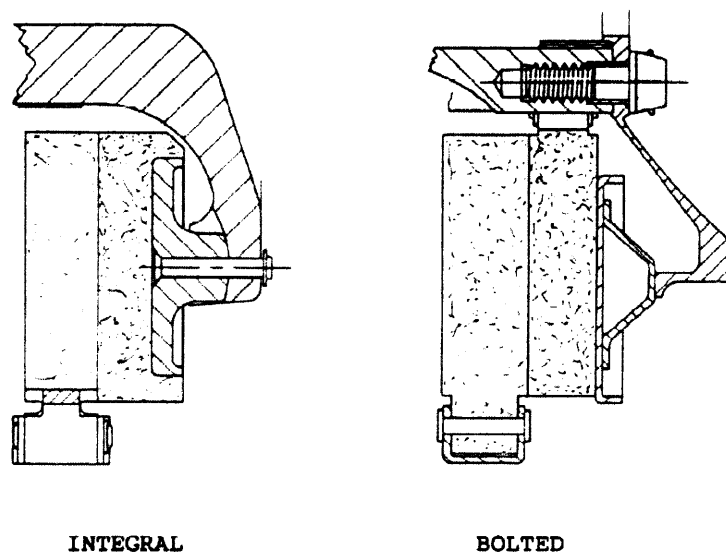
Integral Thrust Pad and Cone Bolt-On Thrust Plate (Dunlop)
